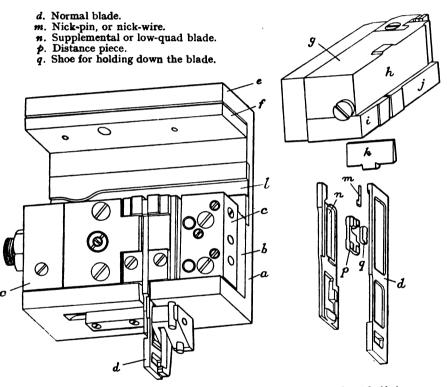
Monotype mould; low-quad, double-blade. Scale: about half size.
